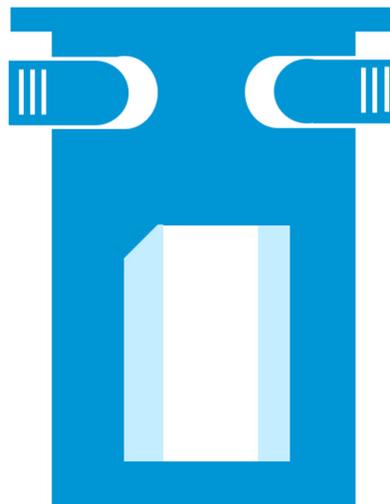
This is a sample drawing of an “Interior Lock” SIM tray design, where once installed the SIM tray can be locked from inside the unit.
